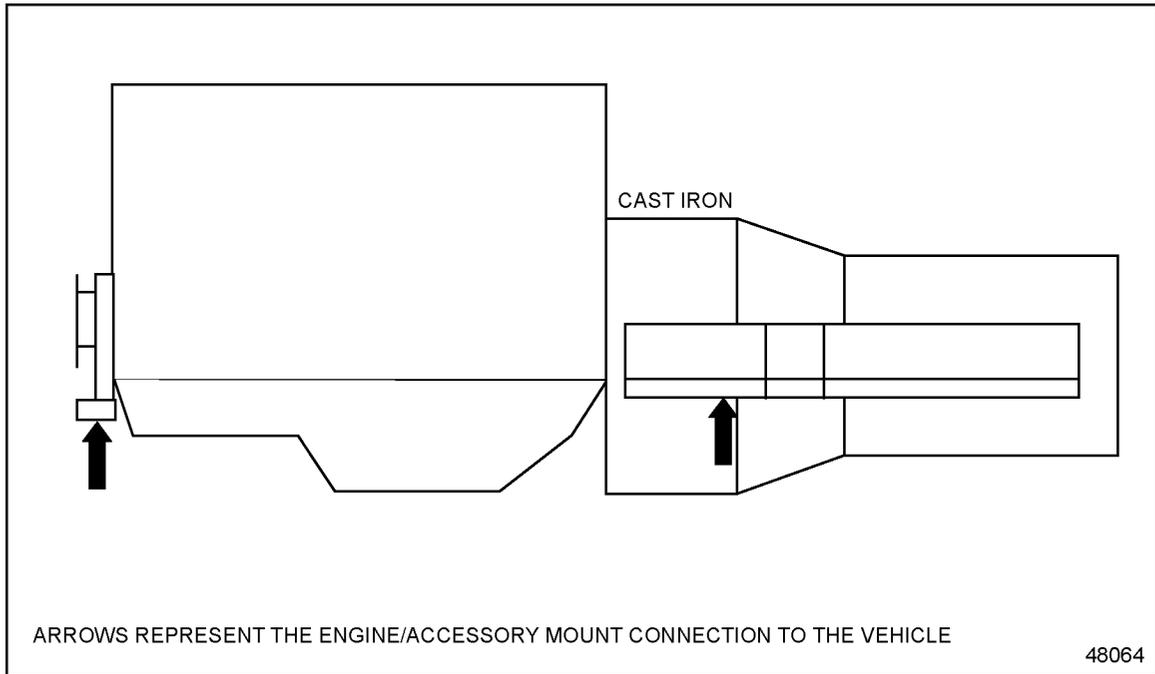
Three Point Mounting with a Set of rear Cradle Mounts
